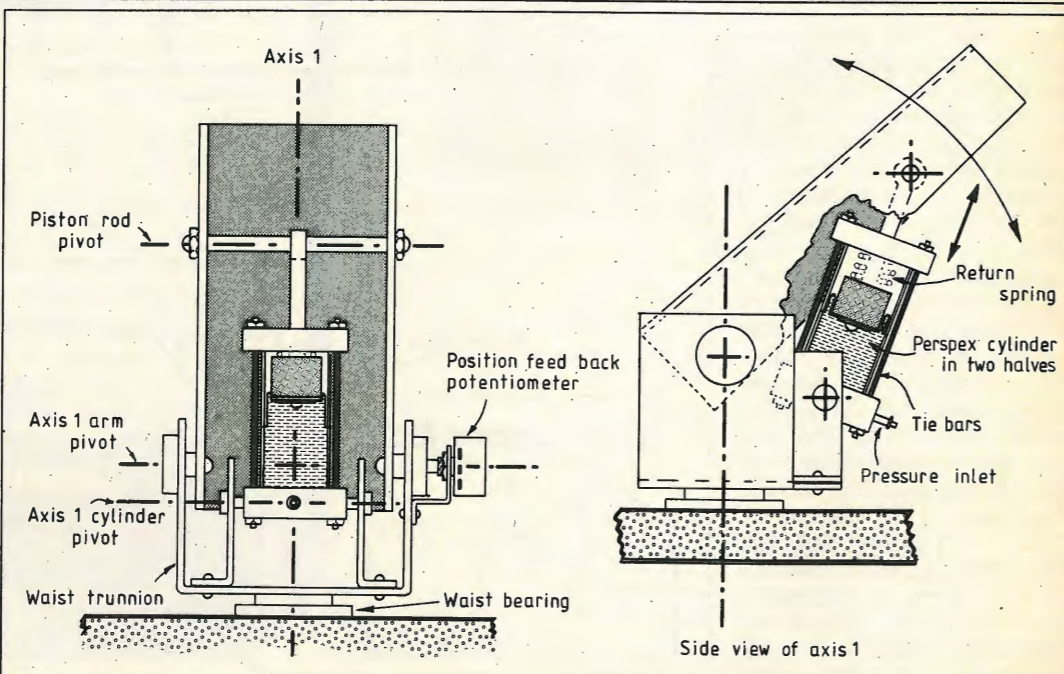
Axis 1 is driven by a single acting, rolling diaphragm actuator. Pivot point at the lower end of the cylinder is actually part of the trunnion assembly. The connecting rod is linked to an axle toward the top end of axis 1 channel section. Lower end of channel section is secured to the trunnion by a delrin bush on each side; these are fixed to the channel and are free to rotate in the trunnion. The feedback potentiometer is fixed to a bracket on the trunnion and the shaft is locked into the delrin bush. Potentiometer gives position feedback of the axis 1 channel section.
